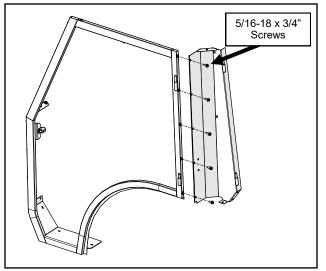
(Assemble The Left Side Frame and Rear Leg)
